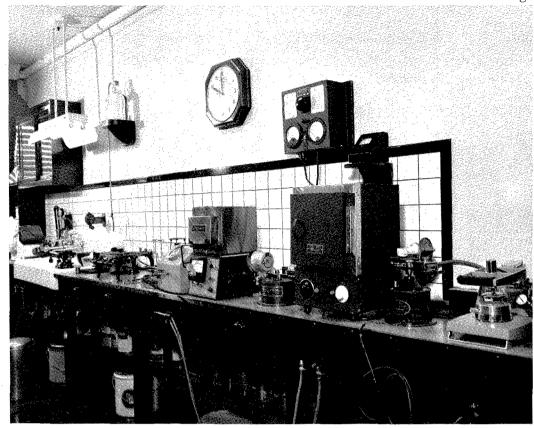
Picture of casting and soldering section of my laboratory.
